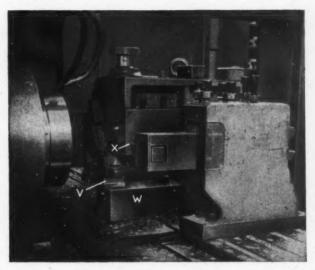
is a general view of the set-up on the Muller lathe, which, it may be mentioned, has a range of eight feed rates, any four of which can be engaged automatically during the machining programme. The component is loaded on to a fixture on the machine spindle, and is located by means of the spigot (A, Fig. 1) and the annular flat face (B, Fig. 1) at the end of the rim, which bears against a facing on the fixture. A bolt is passed through the central hole in the component and is screwed into an air-operated draw-bar in the lathe spindle. A washer on the bolt is pulled into contact with the boss of the component to
